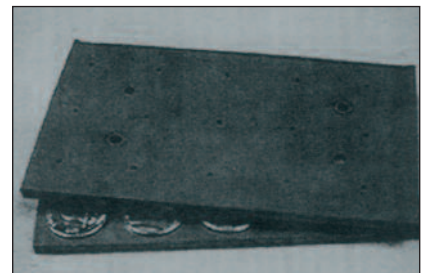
Double-decker carbon board fixture with post holes in the top, ready for soldering. (Courtesy N. Krohn)
